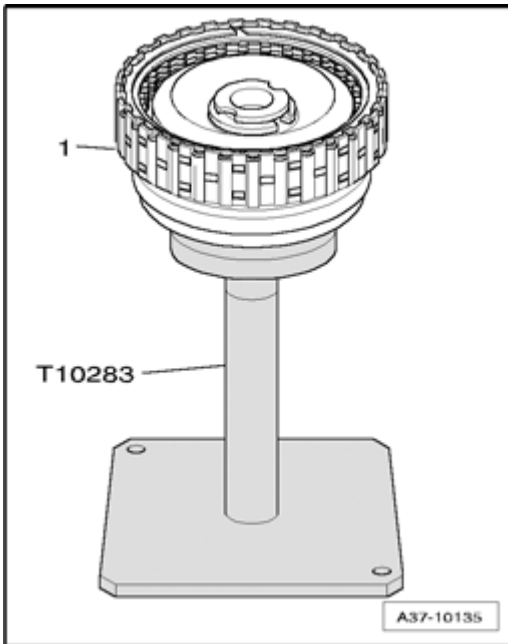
Clutch "A" Placed In Mounting Device T10282
